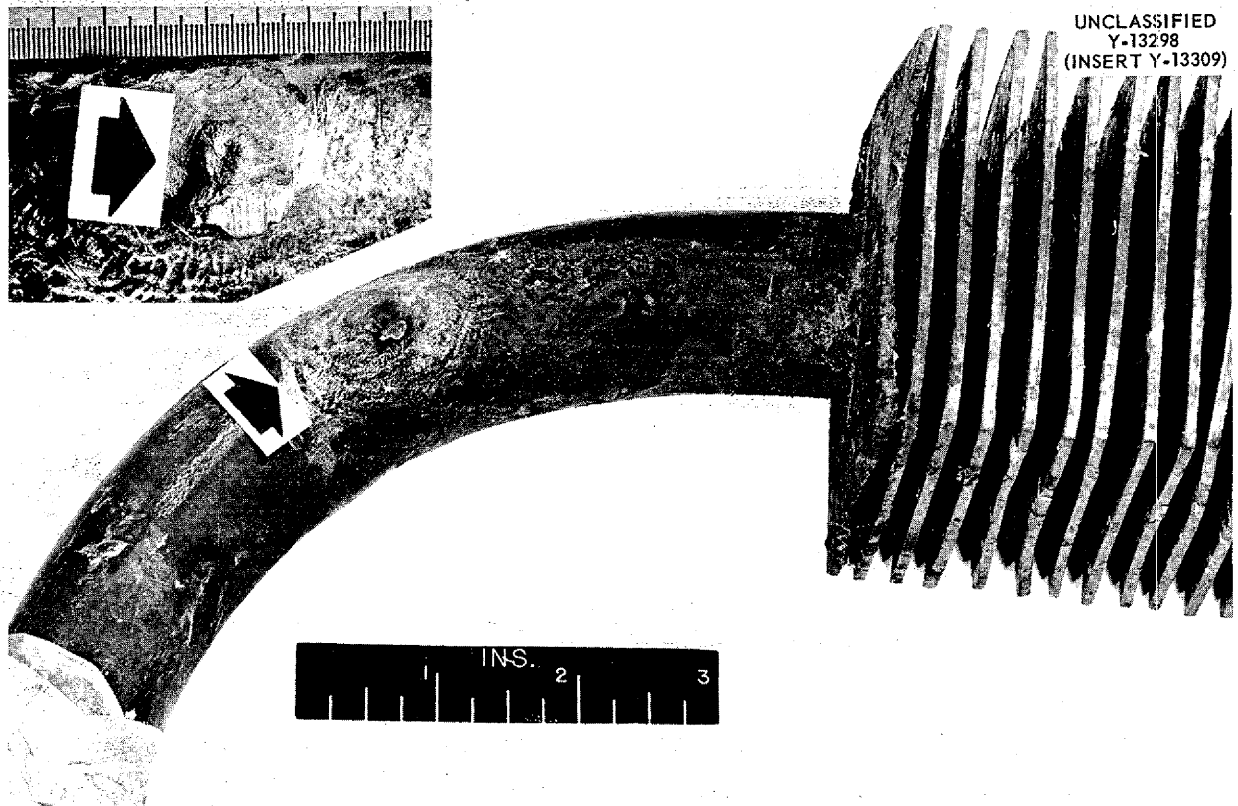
Section of Tube Bend Showing Location of Sodium Leak in Type 347 Stainless Steel Pipe Where Thermocouple Well Had Been Attached. Inset shows location of leak at higher magnification.
